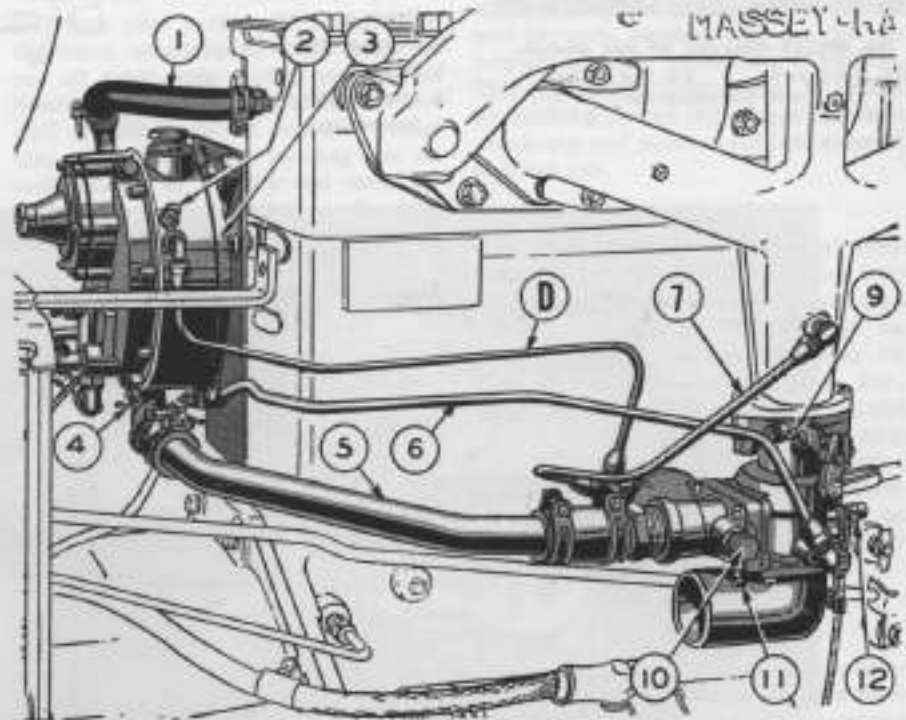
Model 55LP carburetor and regulator layout. Carburetor is Ensign model Xg, regulator is Ensign model R.
